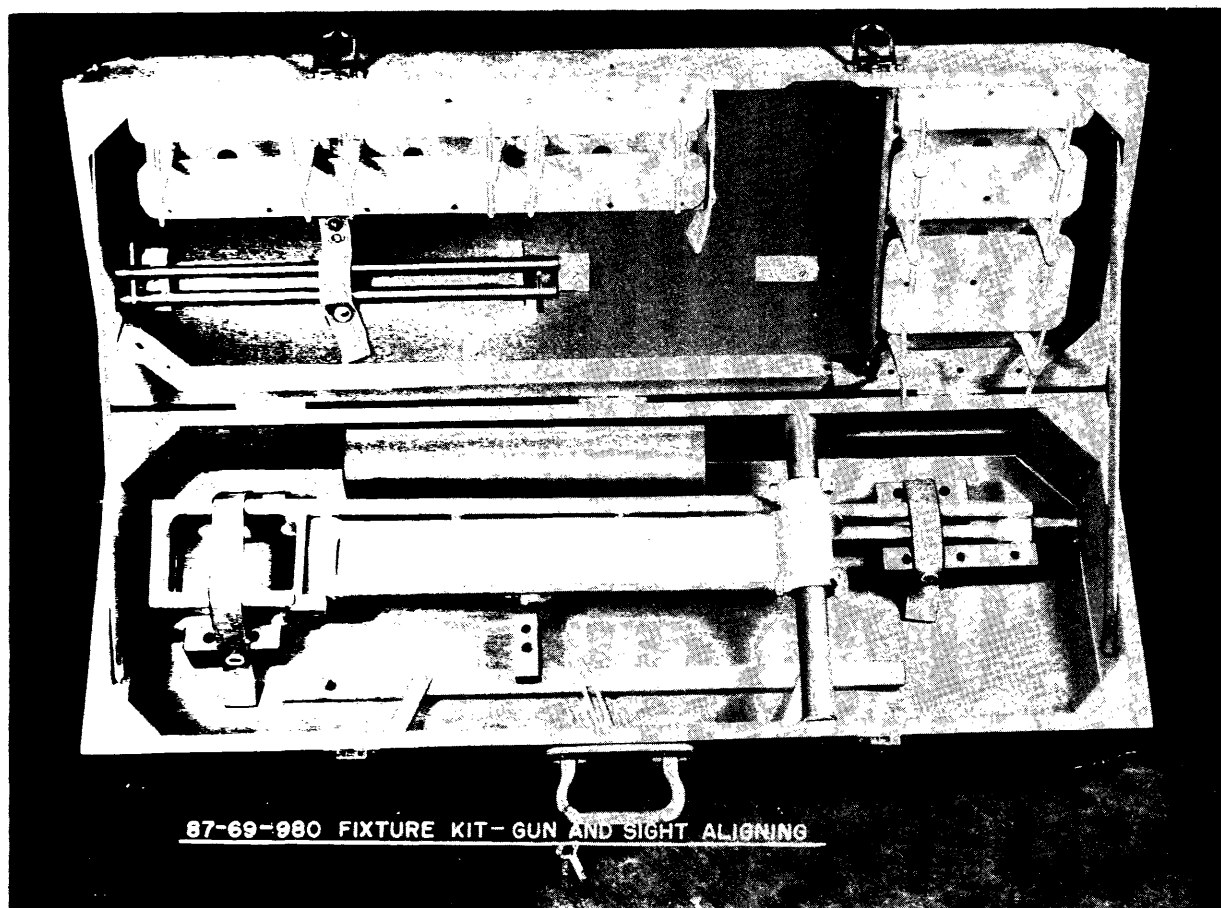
Bore-Sighting Fixtures Packed in Carrying Case
